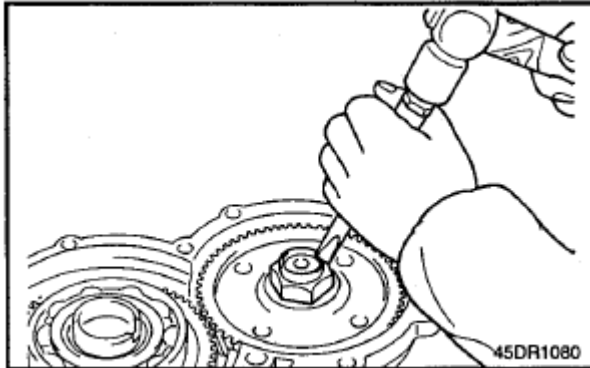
Unstaking Transfer Shaft Lock Nut Stopper
